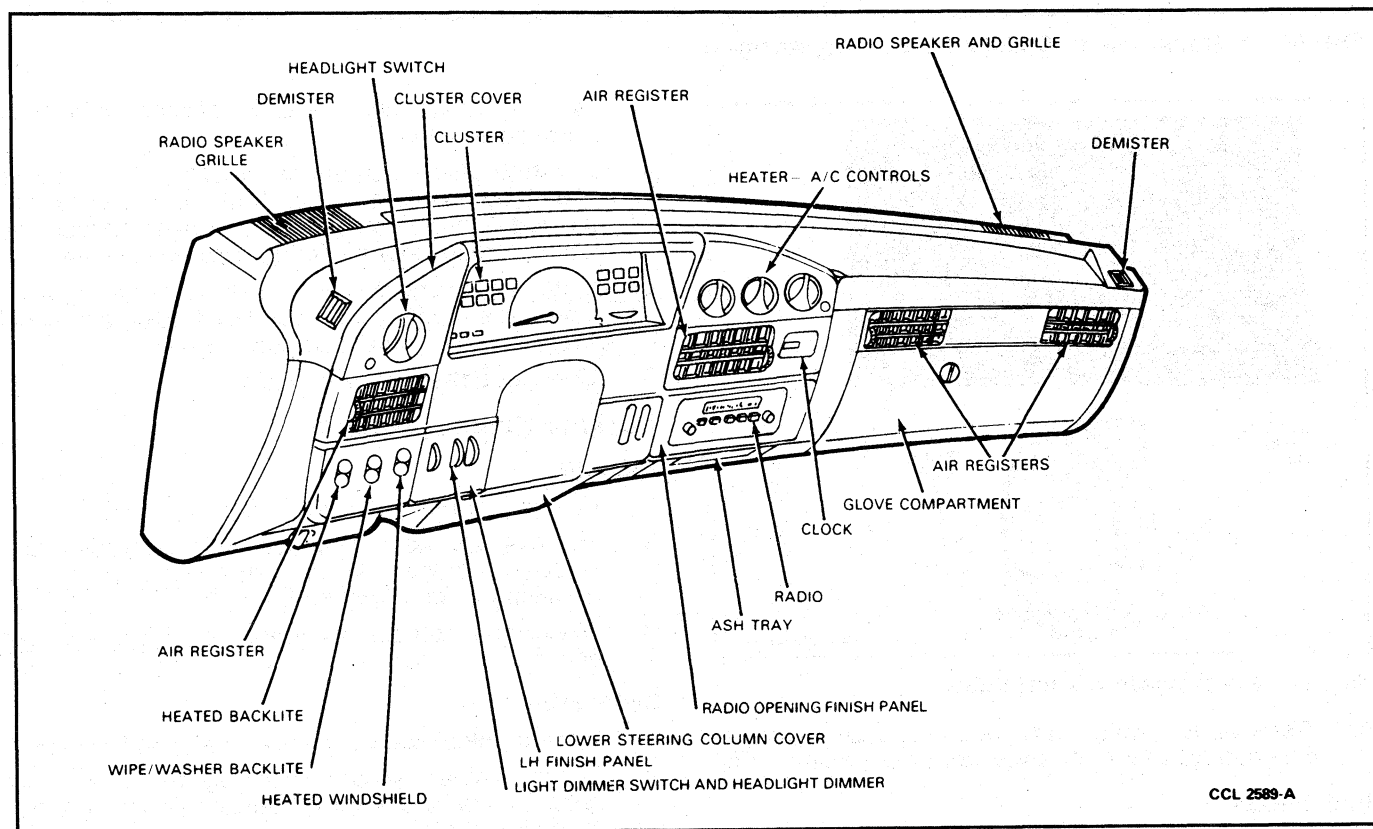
Instrument Panel Assembly, Front View—Taurus
